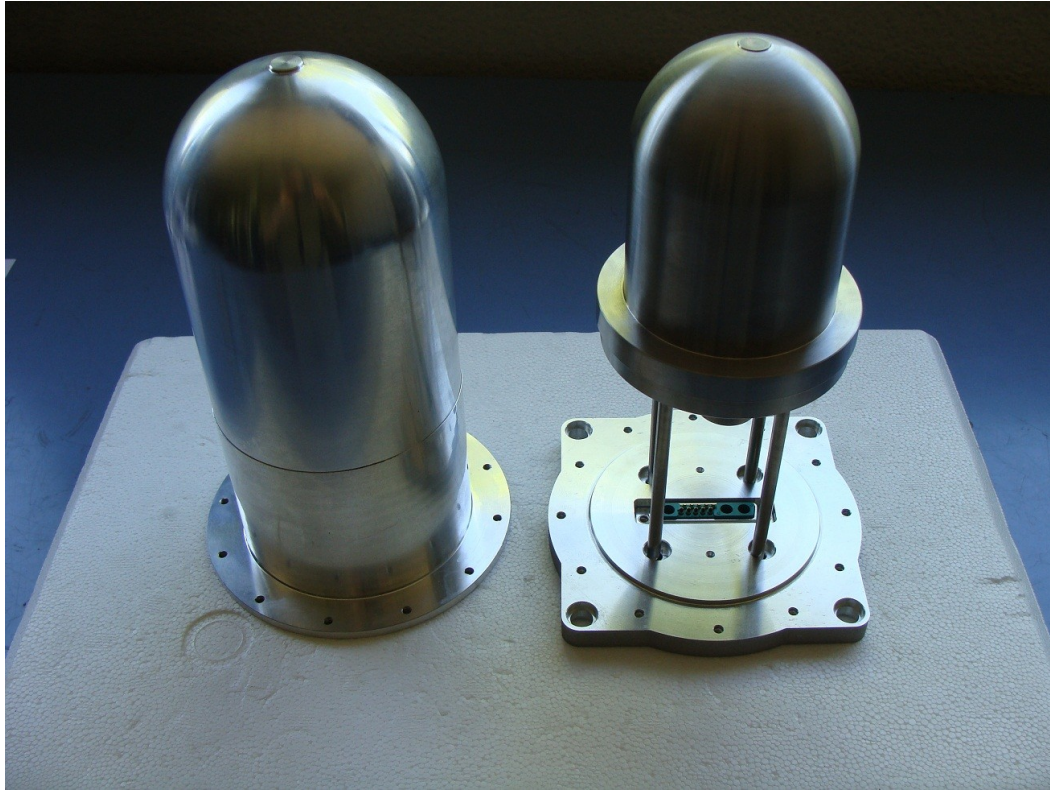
Prototype of the shield housing with the Vacuum System mounted on the four stainless-steel columns.
